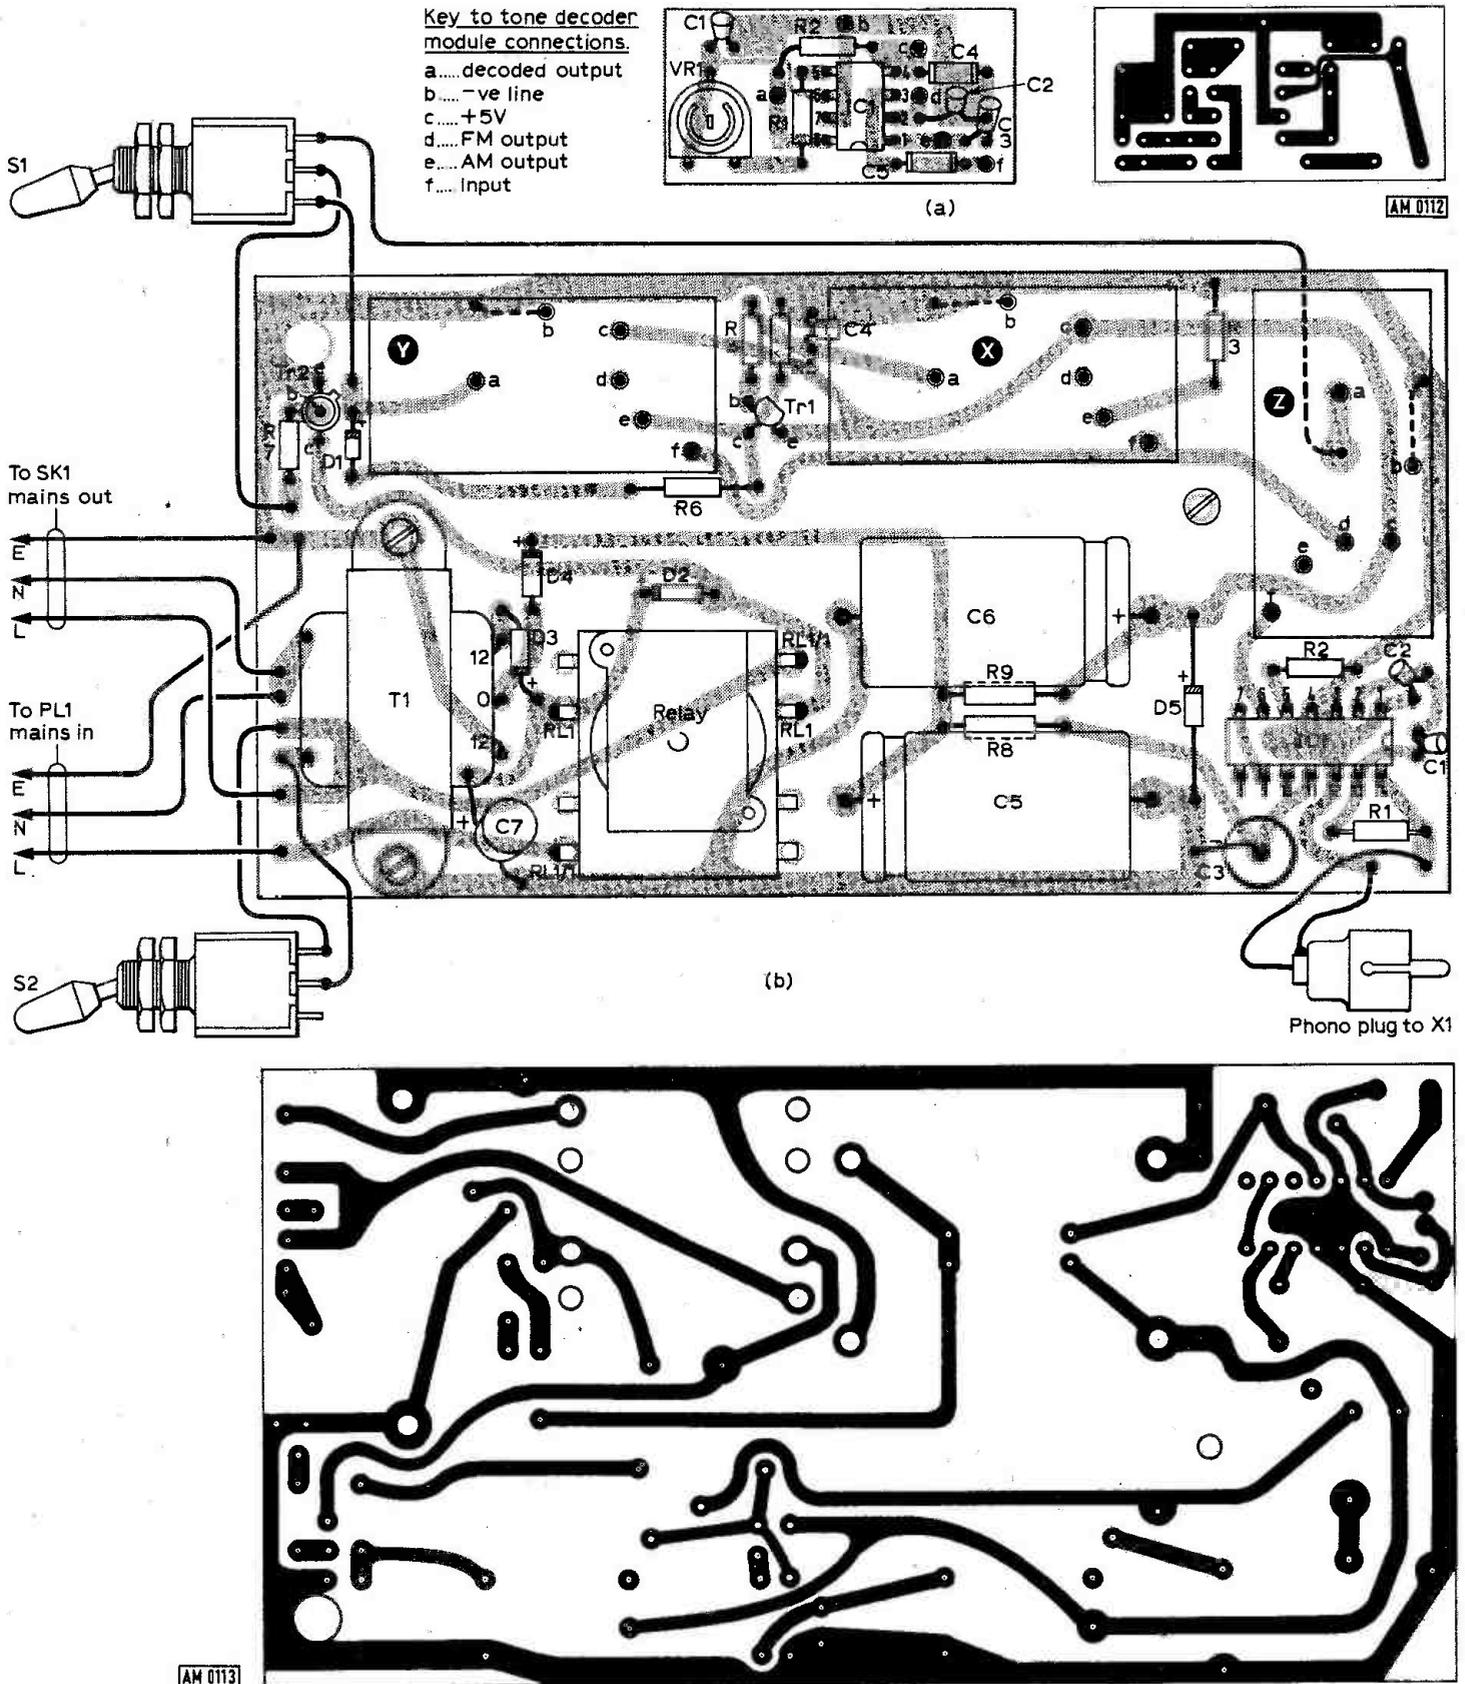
(a) top, full size copper foil layout of a tone decoder pcb and component location. Three of these are required for one function. Certain component leads are extended below the board to mate with holes in the main receiver pcb, Fig. 4 (b), bottom. Note that the power supply circuitry of Fig. 5 is included on this pcb which is also full size.
